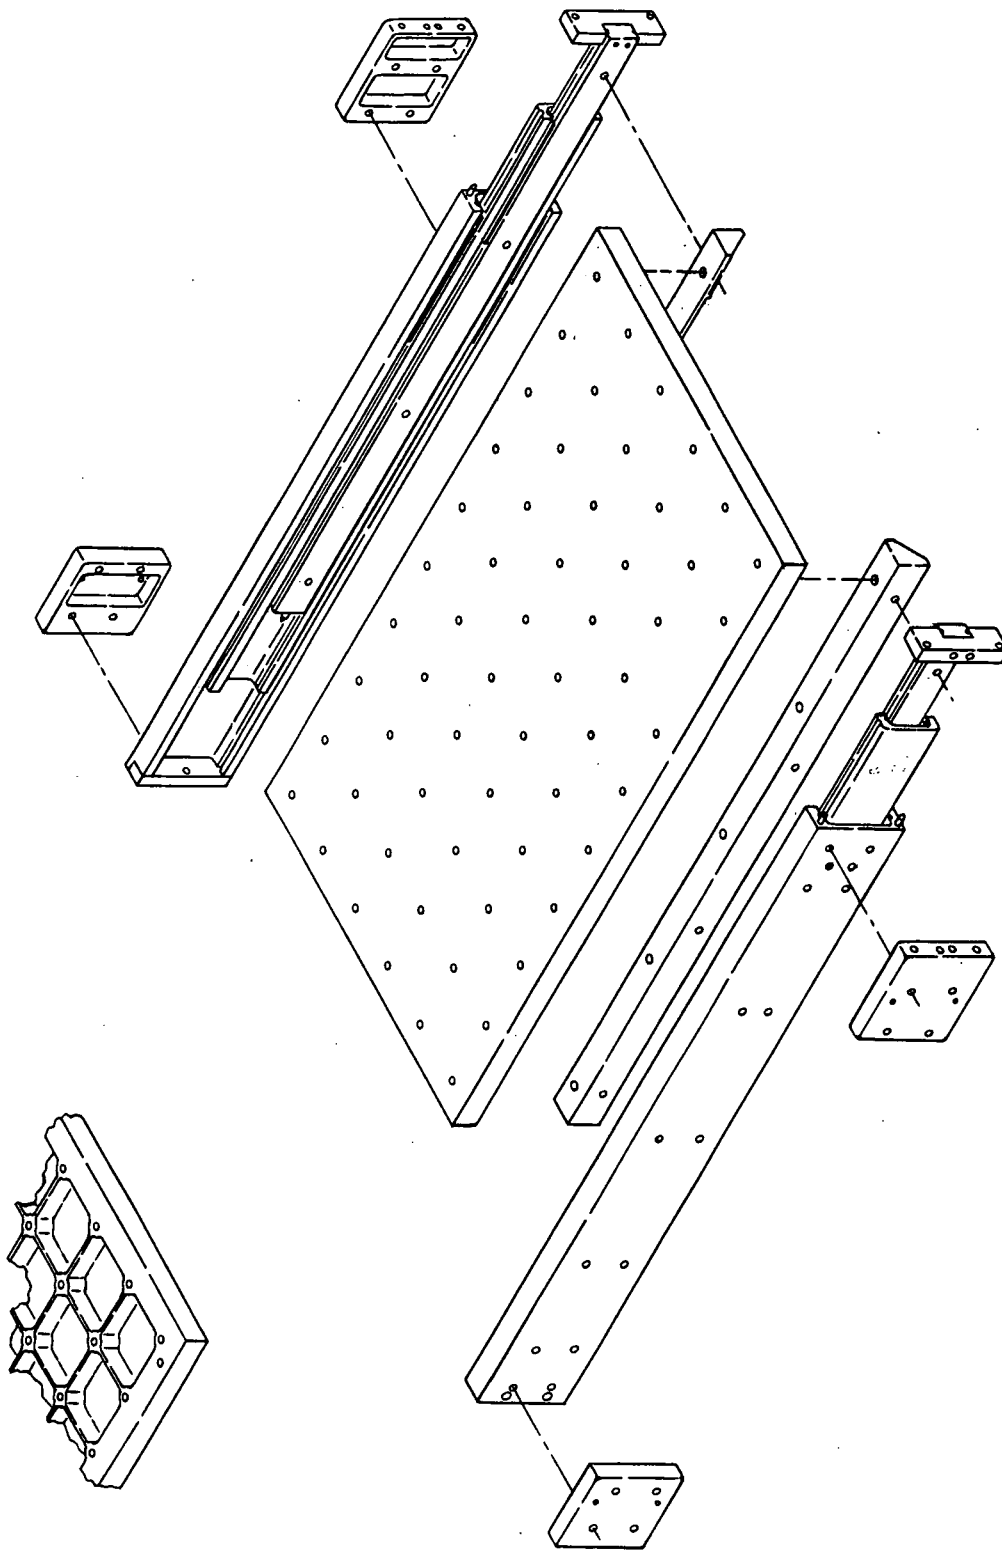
TYPICAL EQUIPMENT TRAY ASSEMBLY
